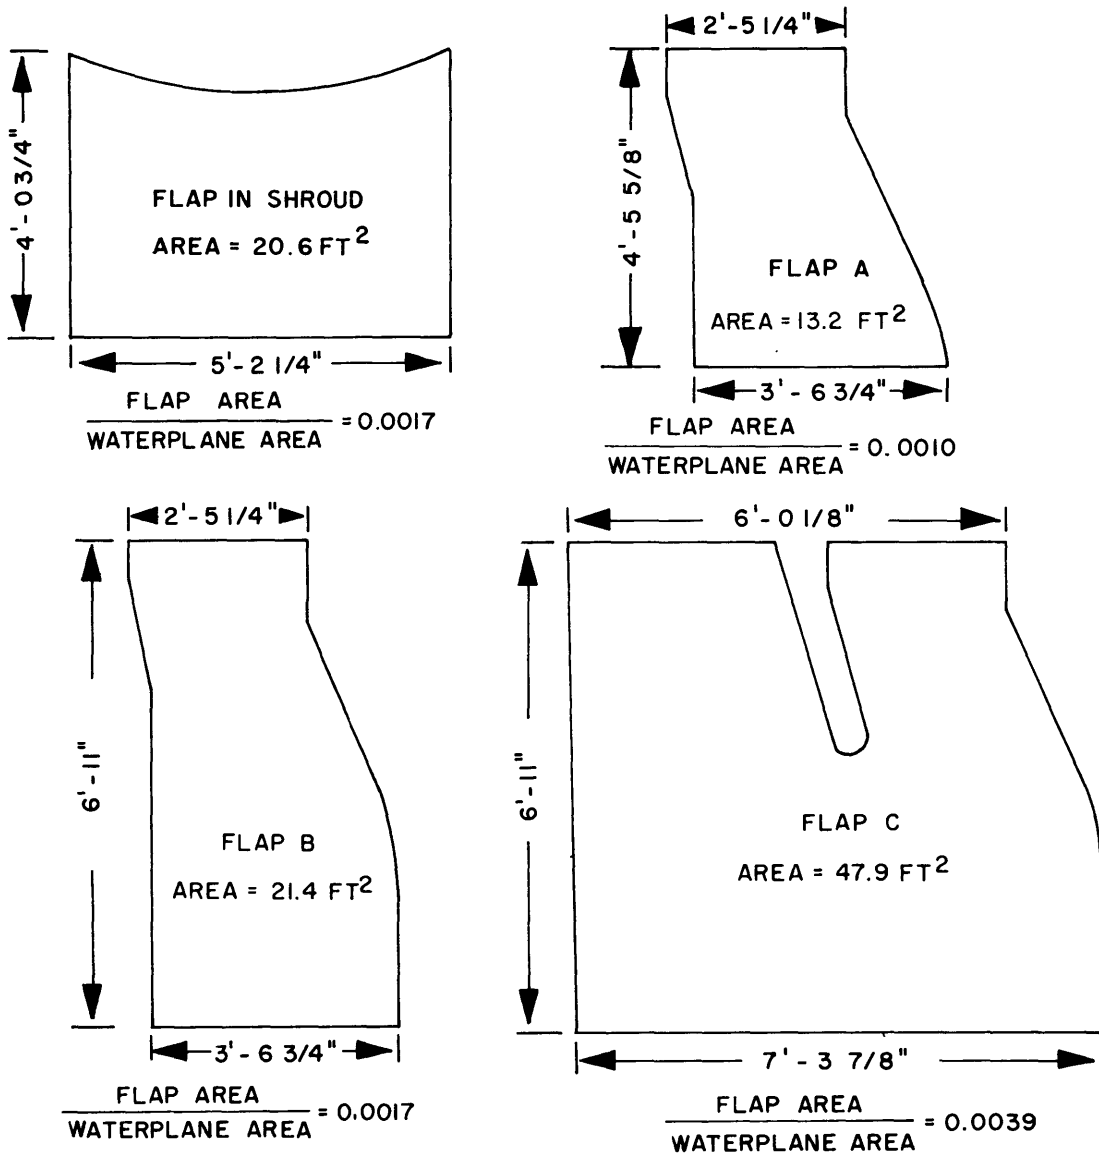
Plan Views of Flaps A, B, C and Flaps in Shroud
